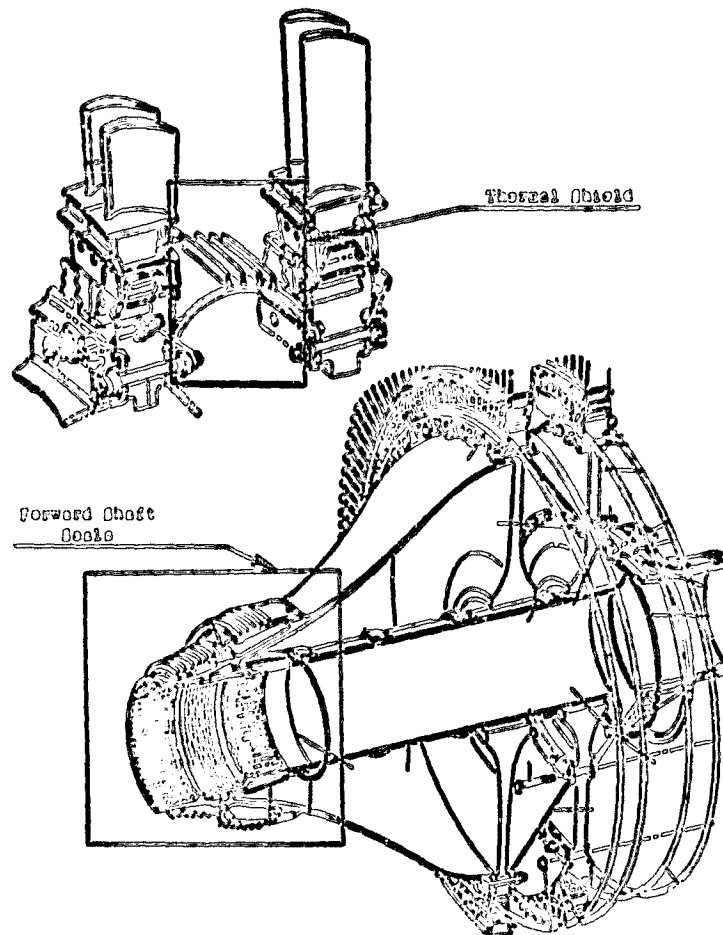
HP Turbine Rotor Forward Shaft Seals and Thermal Shield.
